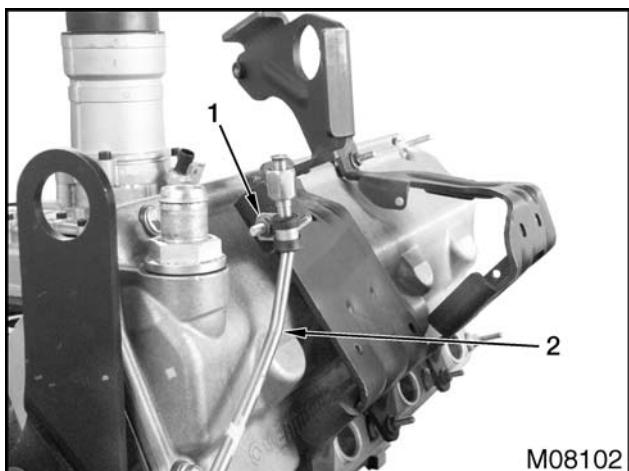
Exhaust Back Pressure (EBP) tube assembly
